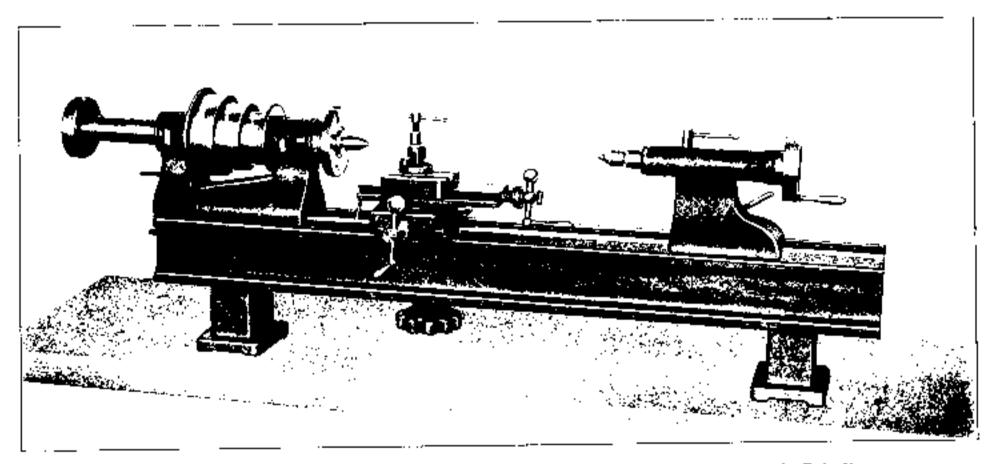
Series 507 Bench Lathe with Plain Bearing Headstock, Screw Draw-in Spindle, Slide Rest and Plain Tailstock
